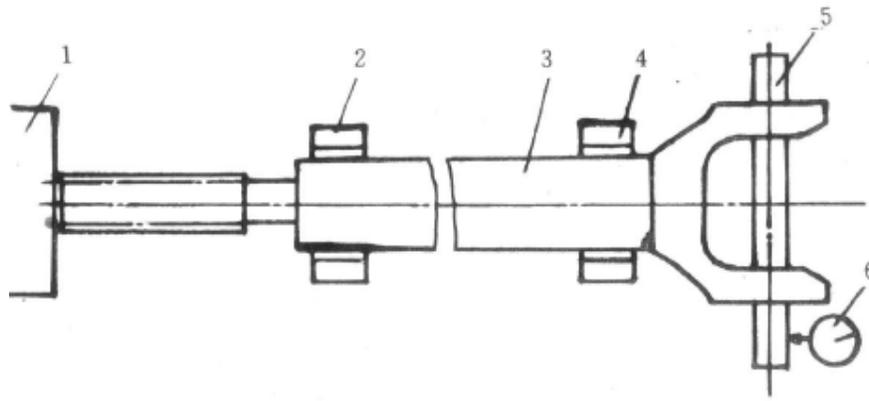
Inspection of verticality error of public axis of two bearing holes of shaft tube yoke to axis of drive shaft
